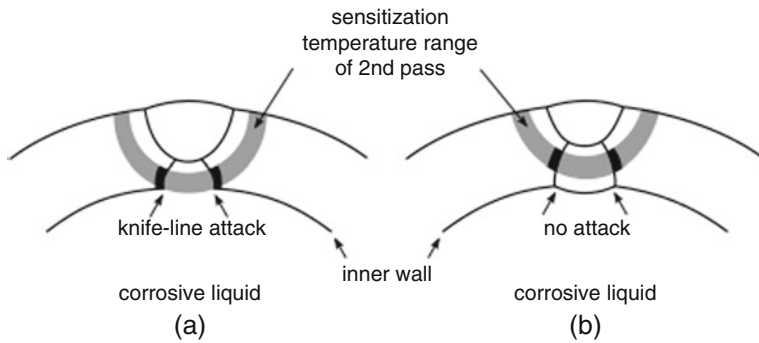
Dual-pass weld of stabilized ASS: (a) KLA; (b) no attack. Modified from Principle and Technology of the Fusion Welding of Metals (source: *Principle and Technology of the Fusion Welding of Metals*, Vol. 2, Mechanical Engineering Publishing Co., Peking, 1979)
